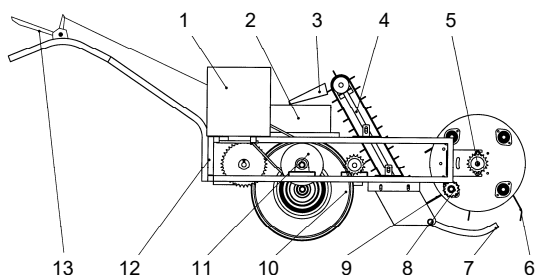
The main assemblies and parts of a motoblock-type harvester: 1 – engine; 2 – berry box; 3 – chute; 4 – conveyor; 5 – picking reel; 6 – hook spring-tine; 7 – copying unit; 8 – picking rake; 9 – rake tooth; 10 – wheels; 11 – transmission; 12 – frame; and 13 – steering levers.
